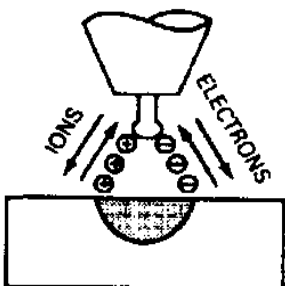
Schematic illustration of tungsten inert gas (TIG) welding process (Mathers 2002)
